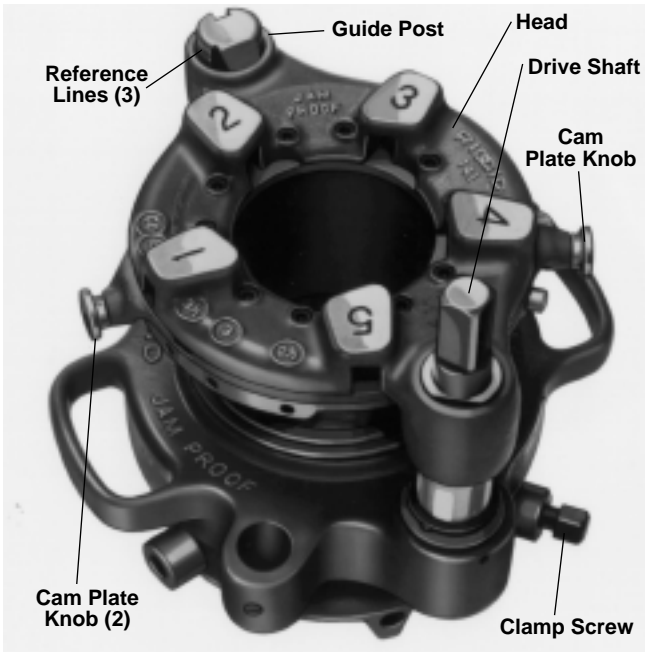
No. 141 Geared Threader Showing Pinion Sleeve and Guide Post Reference Lines
